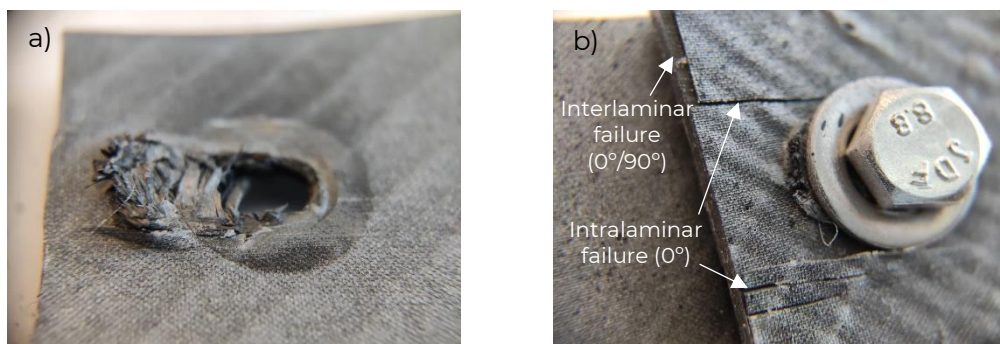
Specimens' failure surfaces: a) Bearing; b) Laminar failure
